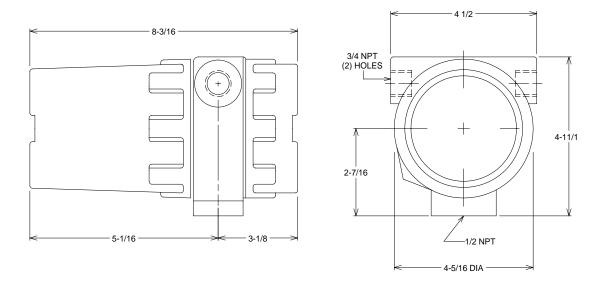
Assembly of 18-215A in an Explosion Proof Housing
